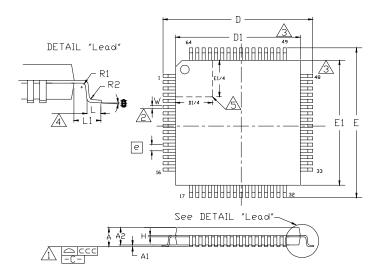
64 Pin TQFP Package Outline (10x10x1.4 mm body - 2 mm footprint)
